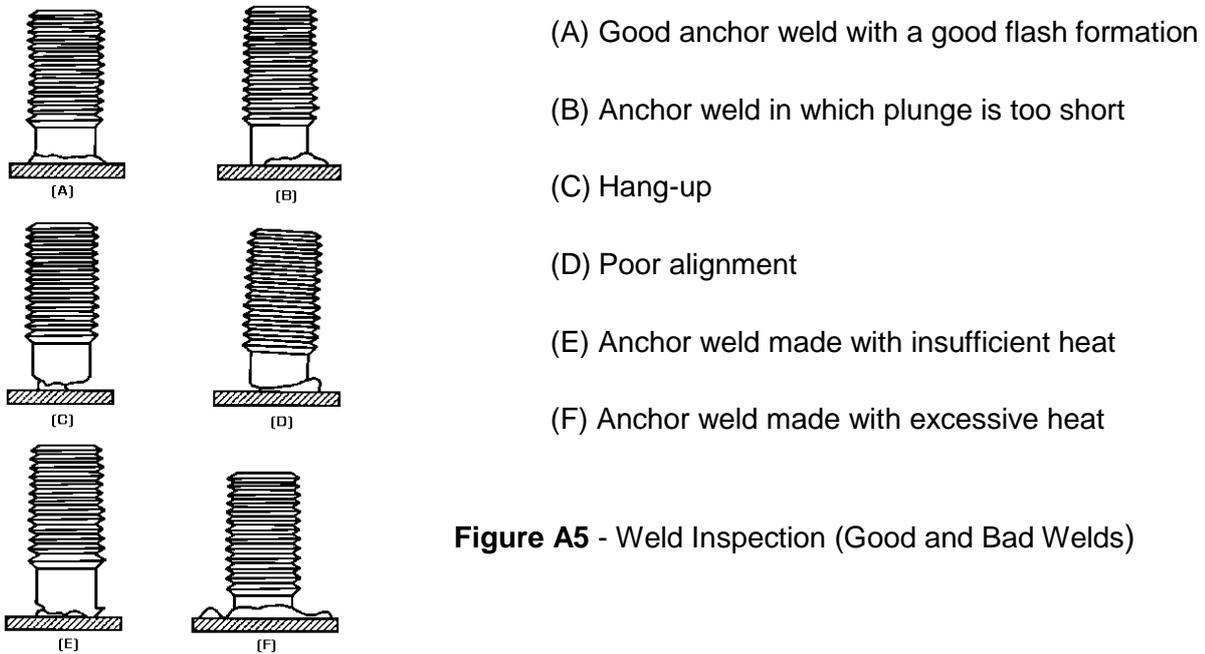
Weld Inspection (Good and Bad Welds)
